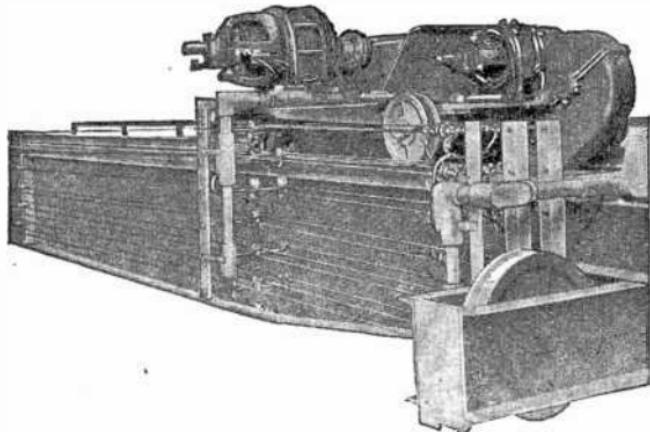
,884.—*Euclid crane construction 11. Moderate duty trolley.* All the hoist mechanism is located in a one piece housing. This housing rests upon two heavy saddle type steel castings. This entire trolley is machined to jigs and all parts are interchangeable. It is used regularly up to 5 tons capacity and intermittently up to 15 tons.
